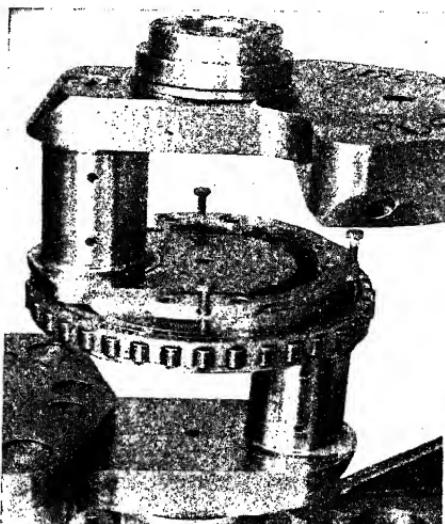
Jacking roller retainer shoes apart with cap screws.
